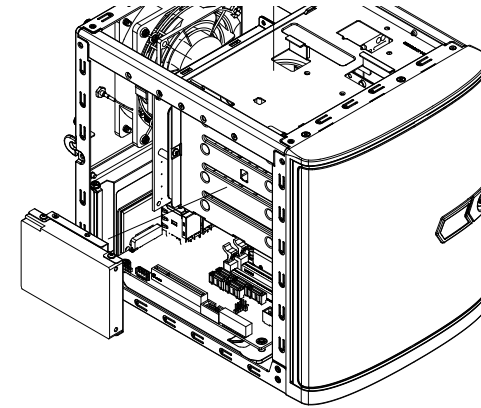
Installing the Side Mounted Fixed Hard Drive
